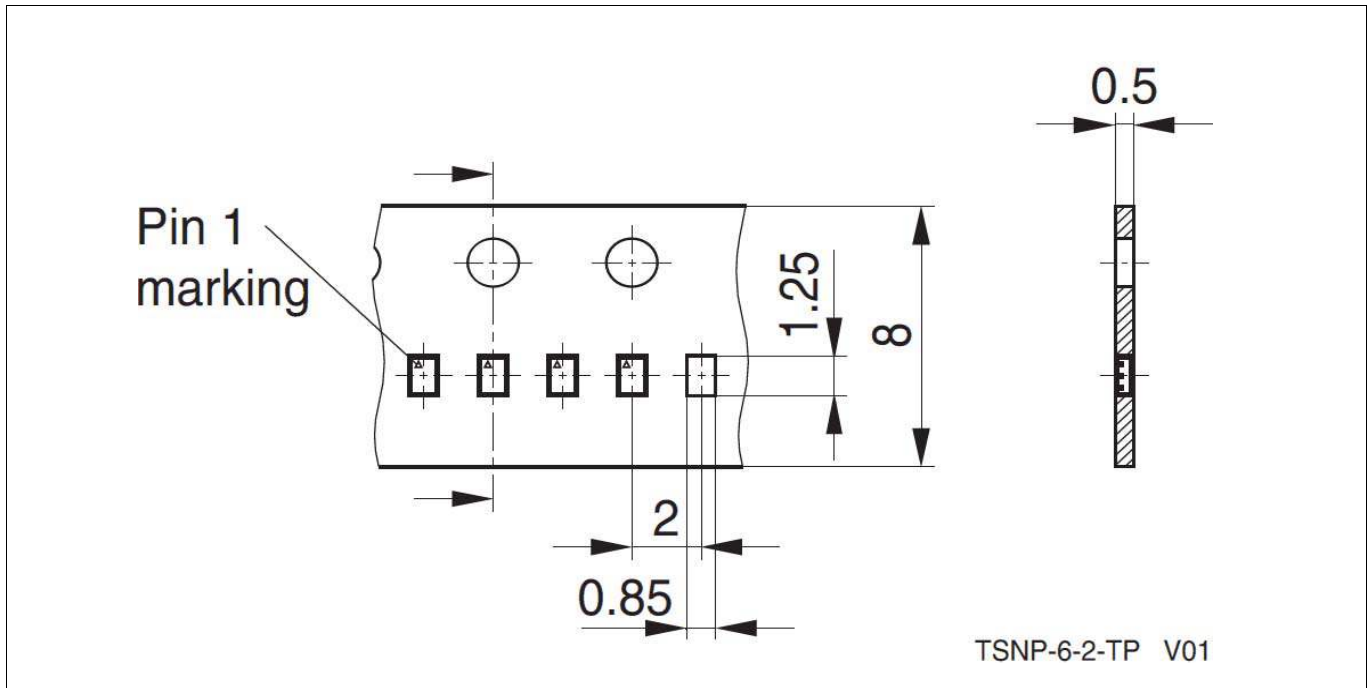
Tape & Reel Dimensions TSNP-6-2 (reel diameter 180 mm, pieces/reel 15000)
